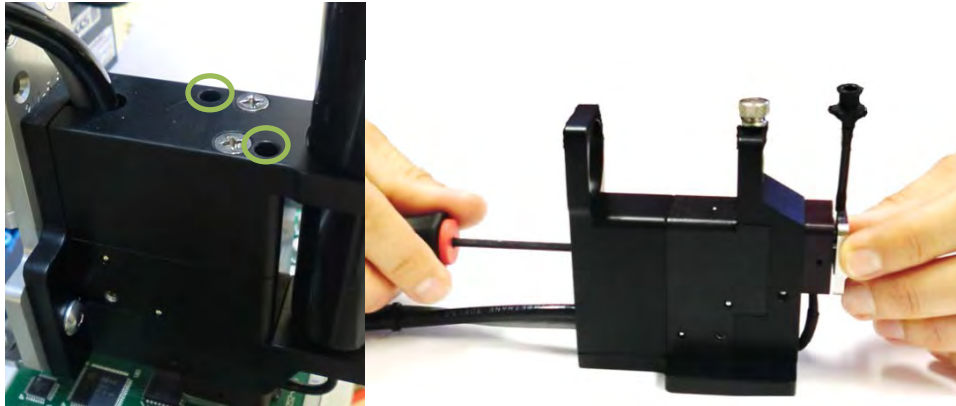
Tighten the Screws to Attach the Nozzle Plate
